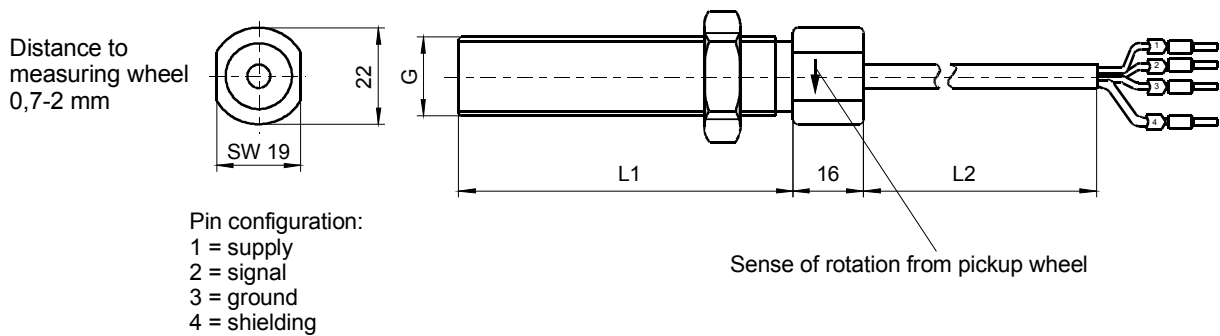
Hall Sensor HIA 30 - 76 with Cable and End Sleeves
